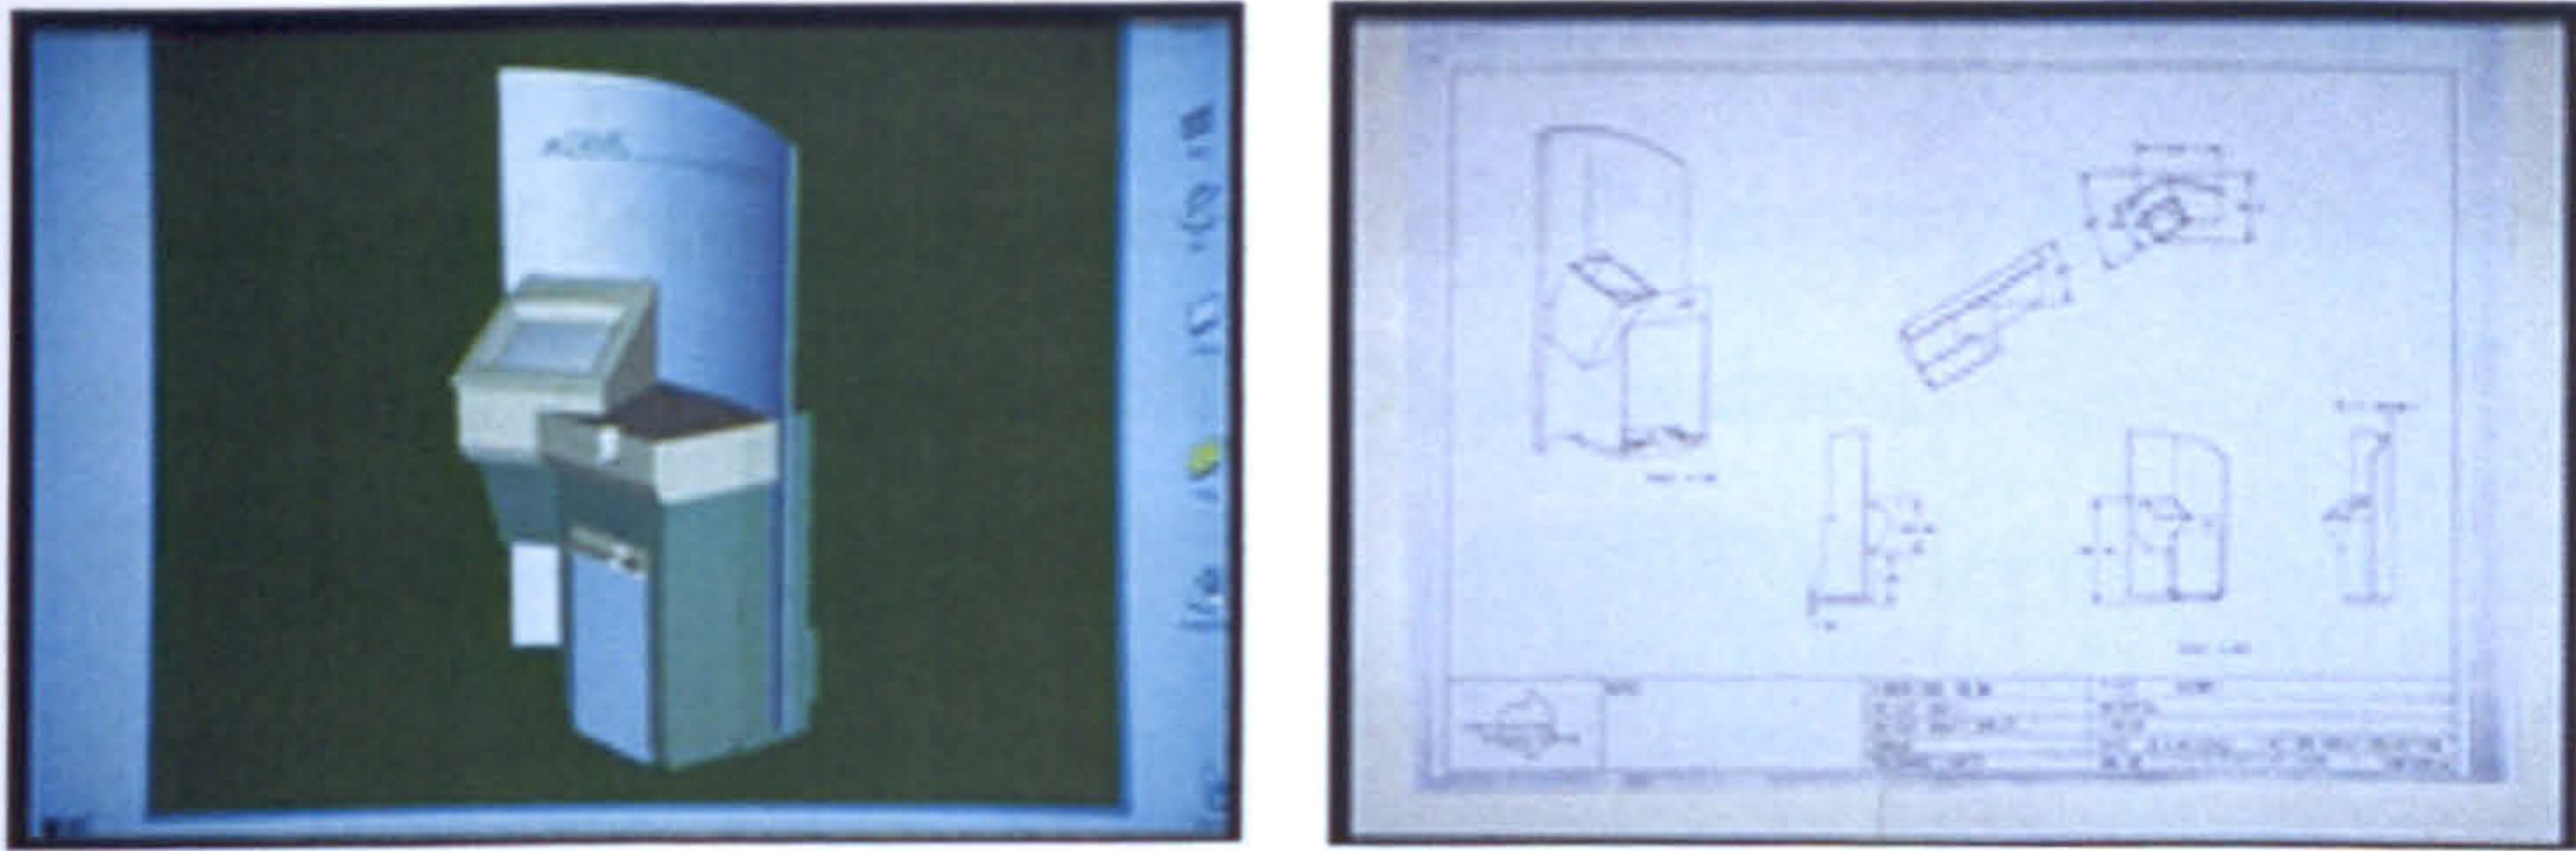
Left: 3D view of the finished design. Right: 2D drawings from the 3D data
